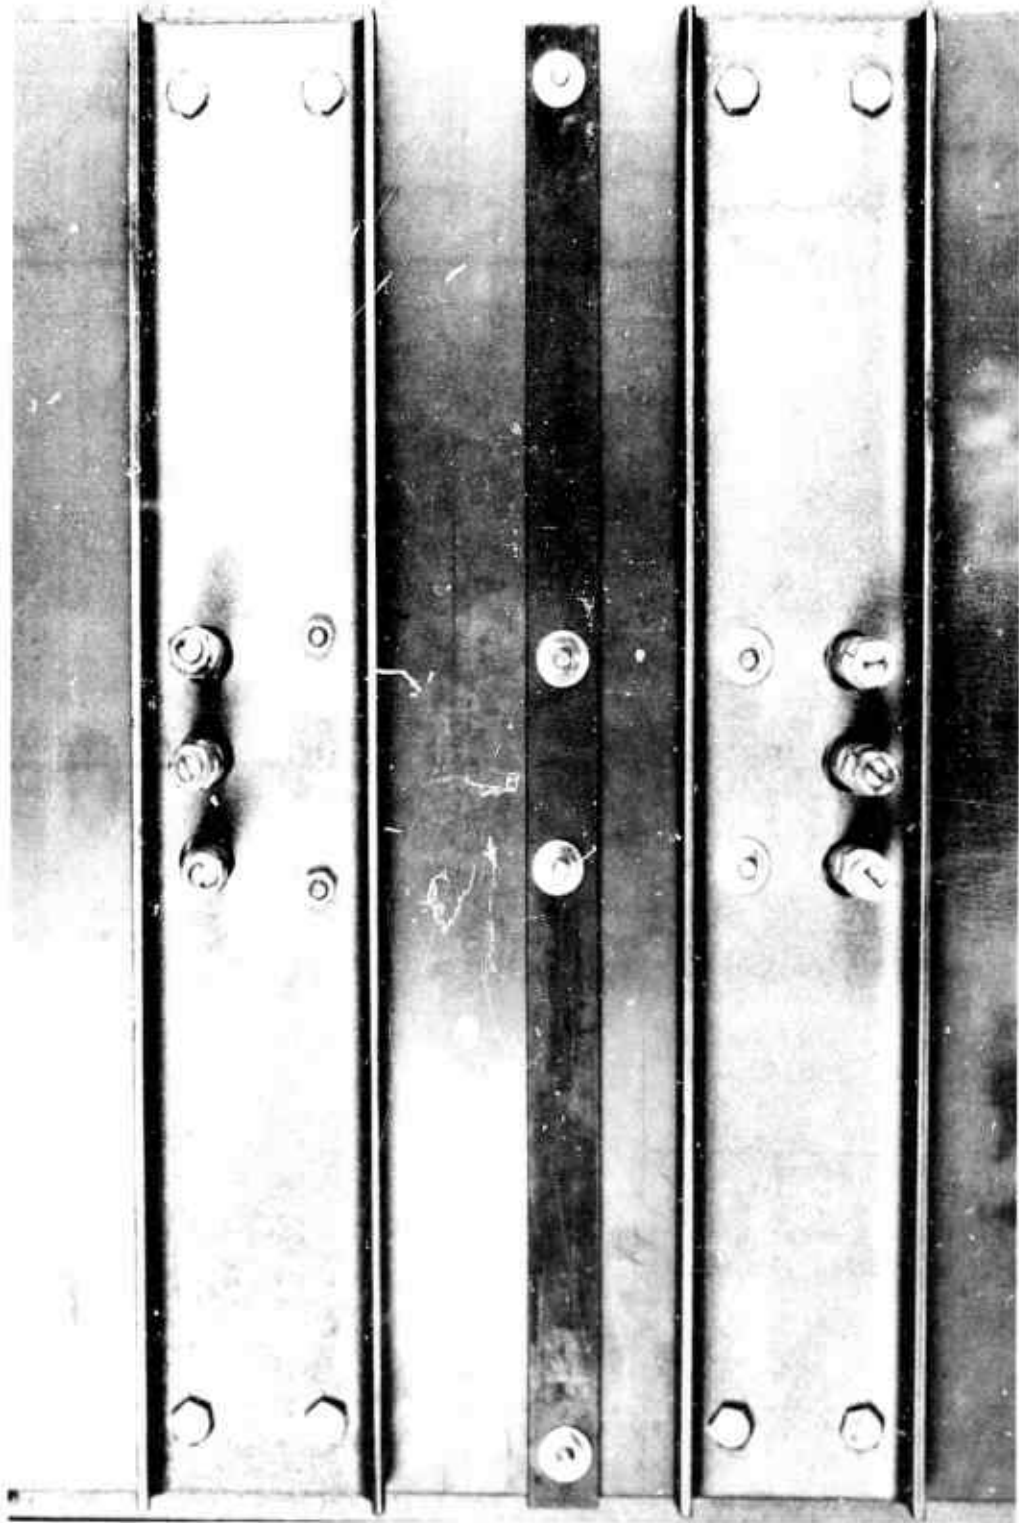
Back view of the LF101 test fixture, showing the extra 1" x 1/4" stiffening bar added at center.
